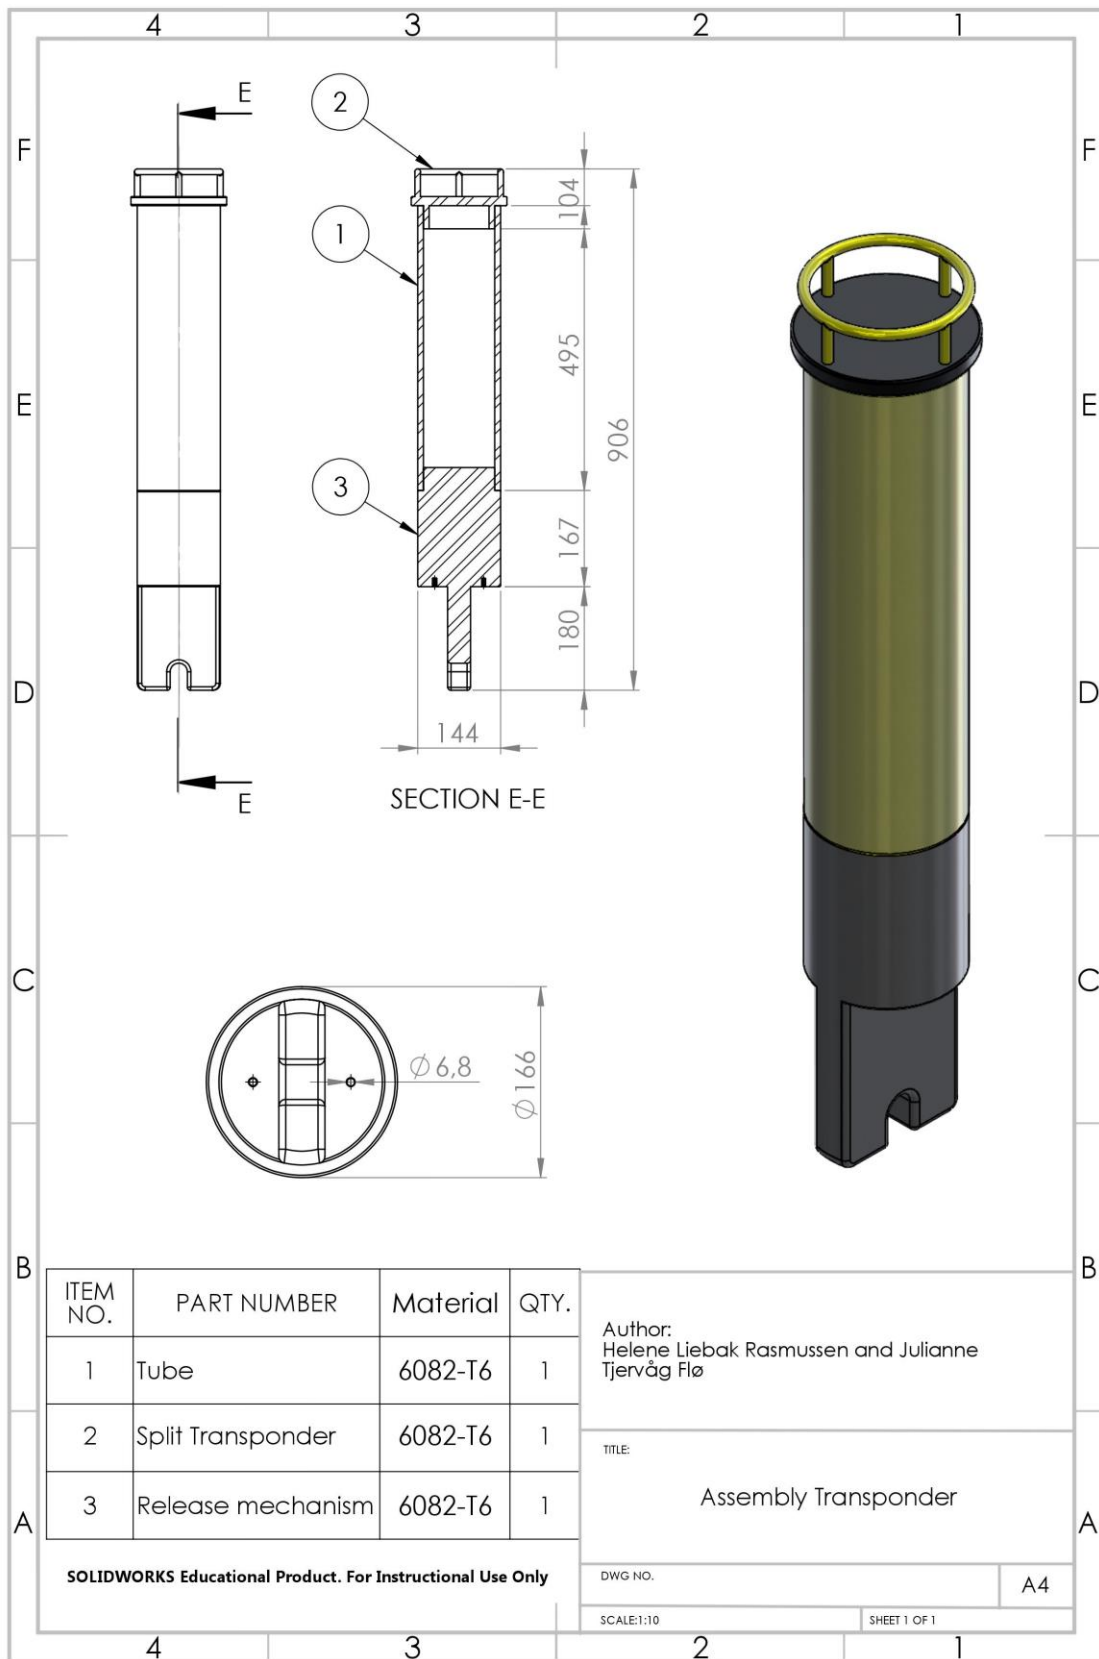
Technical drawing of the transponder. Created in SolidWorks.
